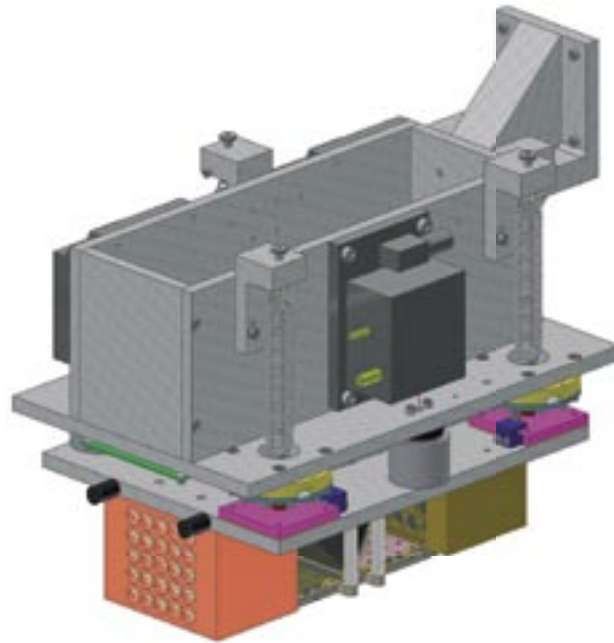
Schematically illustrated test setup of the inspection system with z-drive and optical components
